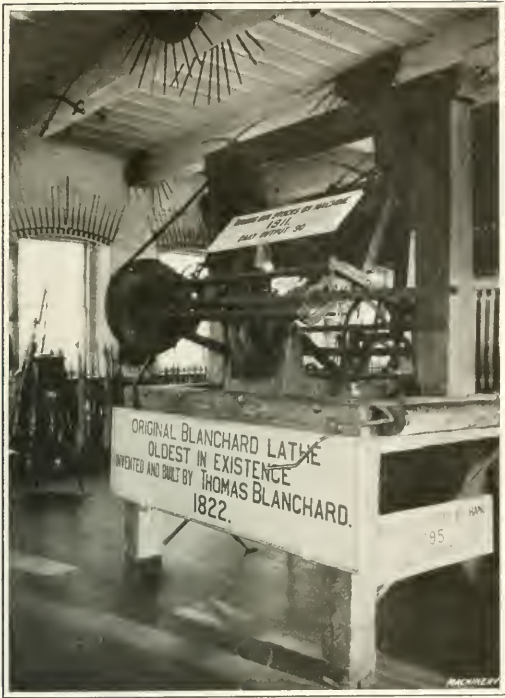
Original Blanchard Lathe designed and built in the Springfield Armory in 1822 by Thomas Blanchard
